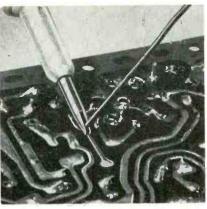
Printed wiring can be reinforced by laying down a path of smooth flowing solder.
